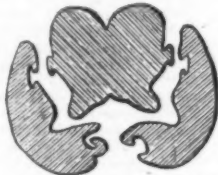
SECTION OF THE SAW, SHOWING HOW THE PARTS FIT TOGETHER LIKE A PUZZLE.
